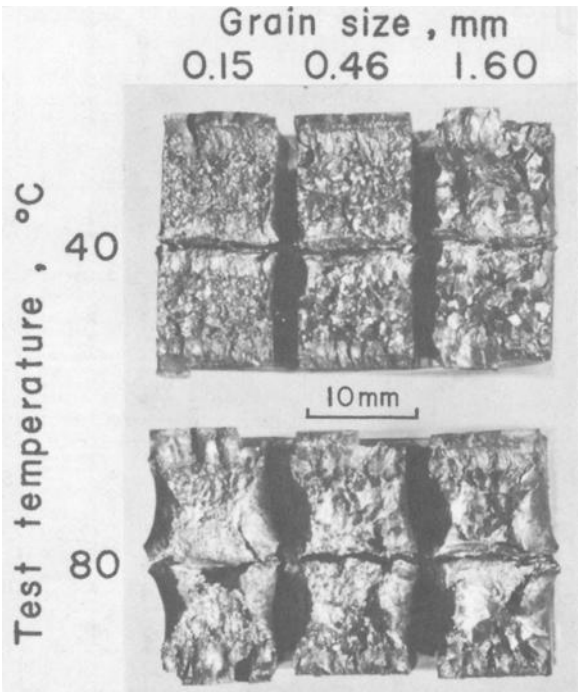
Examples of fracture surfaces of the specimens having brittle weld cracks of 26Cr-1Mo steel whose grain sizes are 0.15 mm to 1.6 mm (test temperatures: 40 and 80°C).
